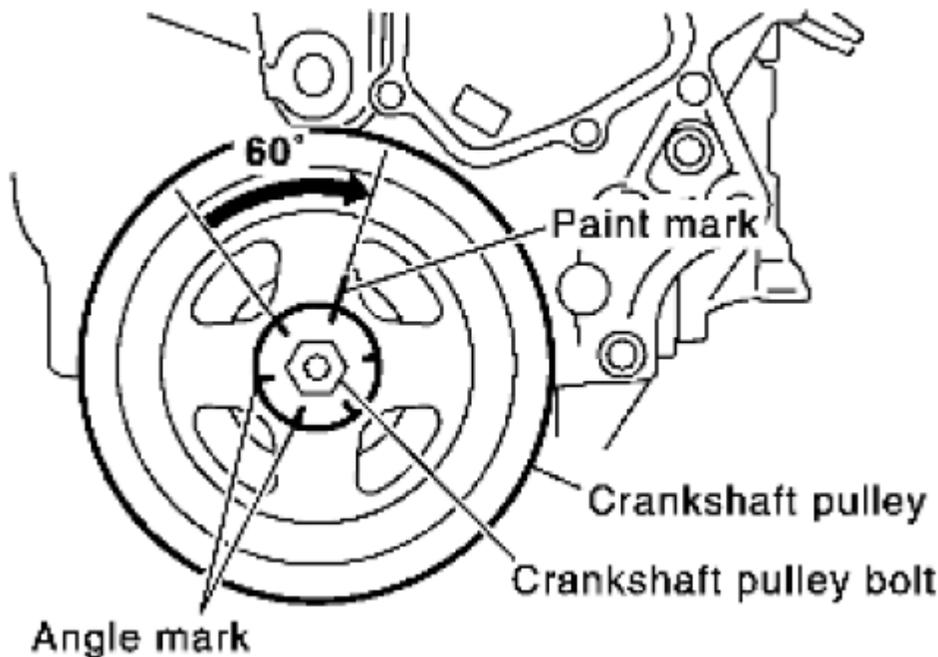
Tightening Position Of Crankshaft Pulley Bolt
